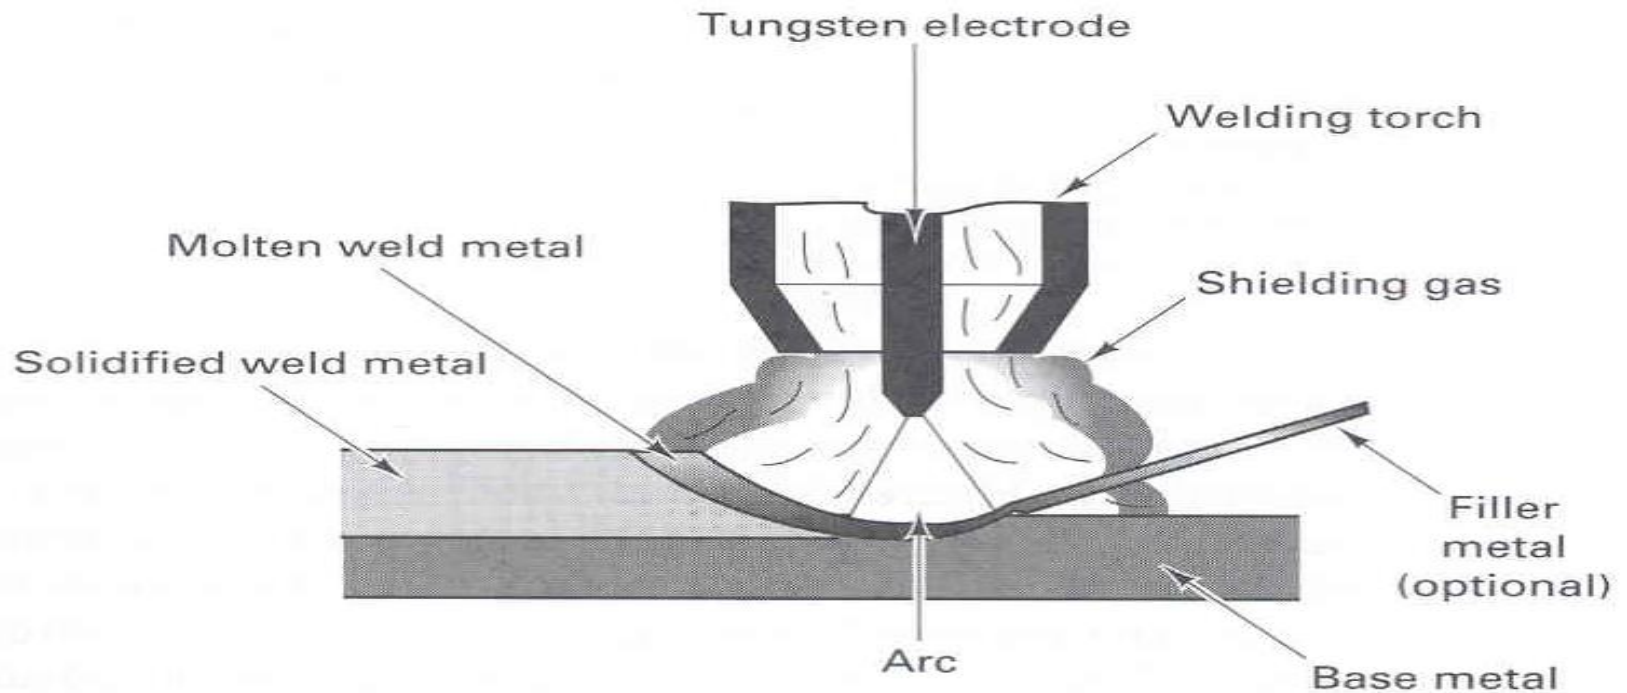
Schematic diagram of gas tungsten arc welding (GTAW). (Courtesy of American Iron and Steel Institute, Washington, D.C.)
